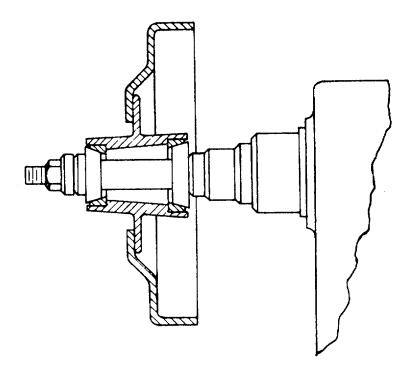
TAPERED BEARING HUB (TRUCK)
